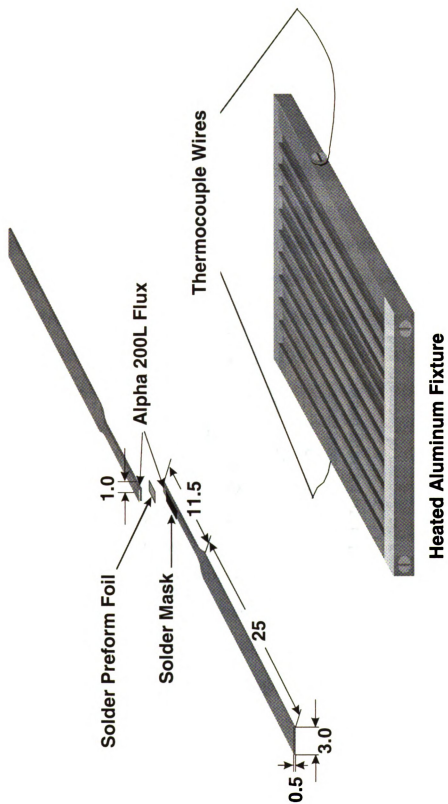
Schematic diagram of the assembly of solder joints and aluminum fixture to hold solder joints (scales in mm).
